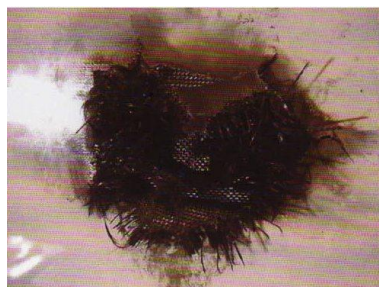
Example of damaged CFRC by lightning strike test [25]
